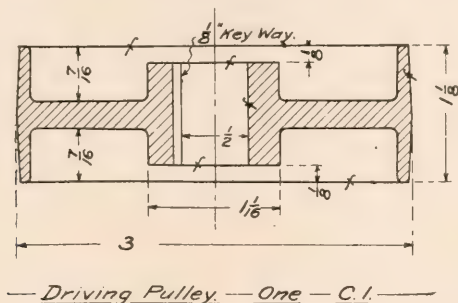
SAMPLE DRAWING TO ILLUSTRATE DETAILS.
